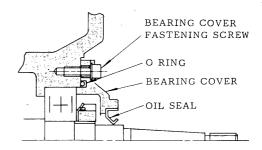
Construction of Bearing Section with Oil Seal and O Ring
